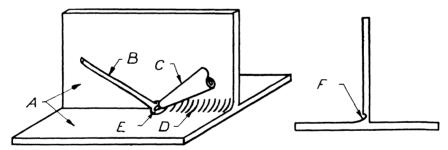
Inside Corner "Tee" welding: A. Parent metal, B. Filler rod, C. Torch, D. Bead, E. Puddle, F. One must be careful not to undercut
